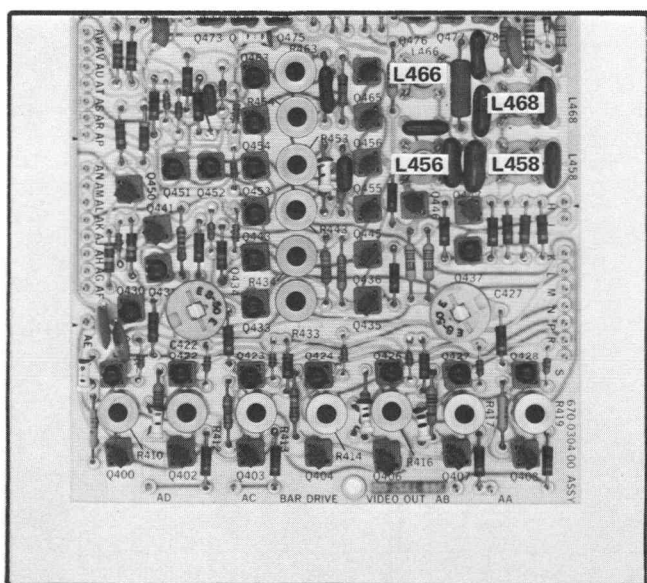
Bar Drive and Video Out board adjustment locations for steps 26 and 30.
